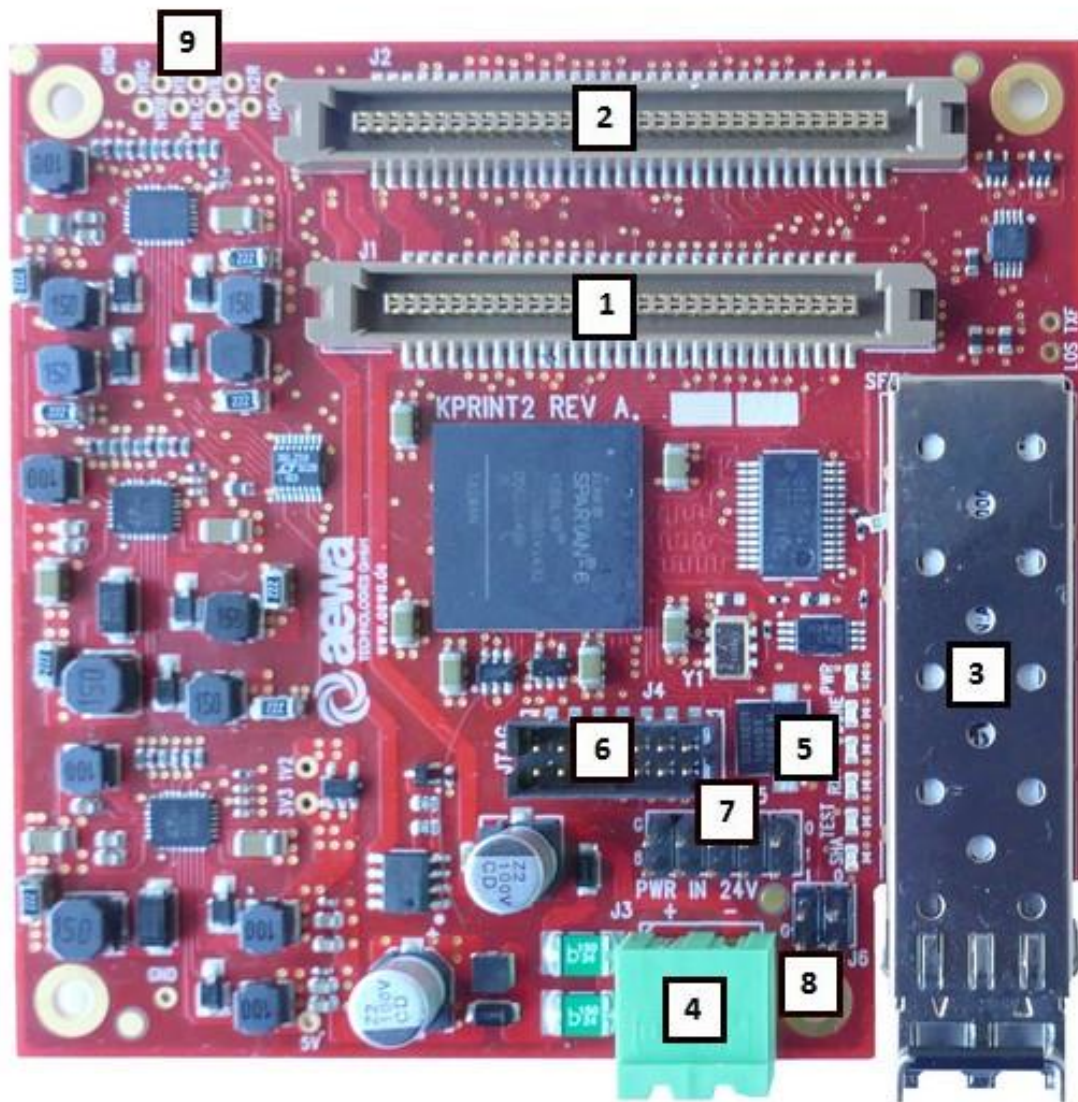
KPRINT2 BOARD COMPONENTS
